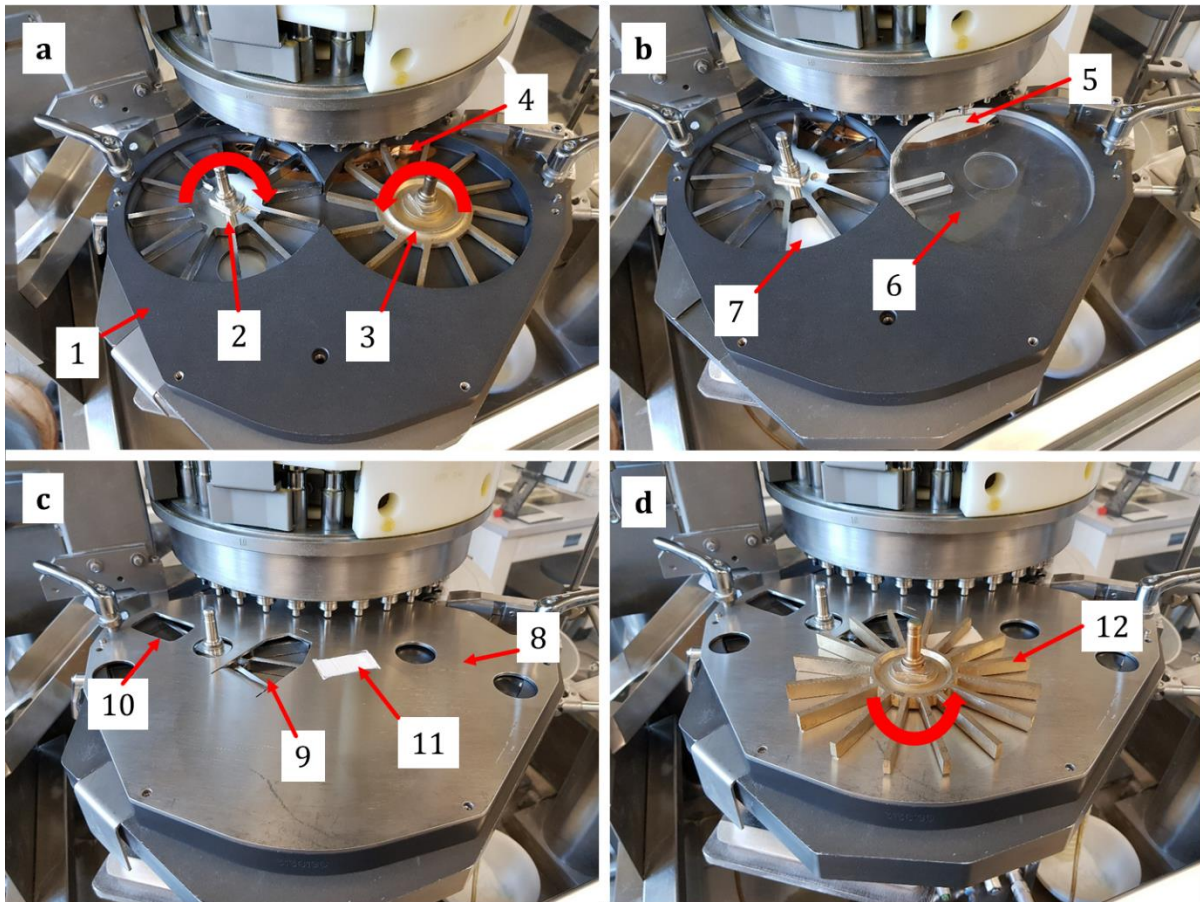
Components of the feed frame. (a) Production typical construction: ground plate 1, flat rod paddle wheel 2 within the filling chamber (chamber height 15.3 mm and chamber diameter 170 mm), dosing wheel 3, and sealing segment 4. (b) Modified construction for the experimental setup of this study: sealing segment 5 partially closed by filling compound within the region of the dosing chamber up to the filling chamber, an acrylic lid 6 filling the dosing chamber, and a lid 7 made of PTFE covering the outflow orifice. (c) partition plate 8 with the partition plate orifice 9 through which the powder enters the filling chamber, the inspection window 10 used for monitoring the powder surface within the filling chamber, and a second partition plate orifice which delivers powder from the distributing chamber into the dosing chamber closed by filling compound 11. (d) distributing wheel 12, placed onto the partition plate to show its
